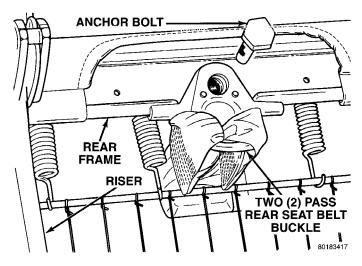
Seat Belt Buckle First Rear—2 Passenger Bench
